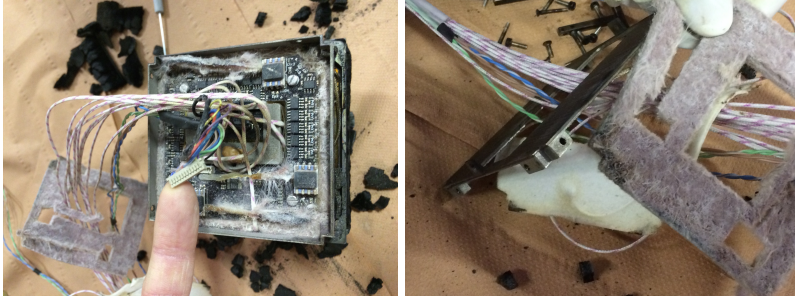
Visual inspection during disassembly - continued.
